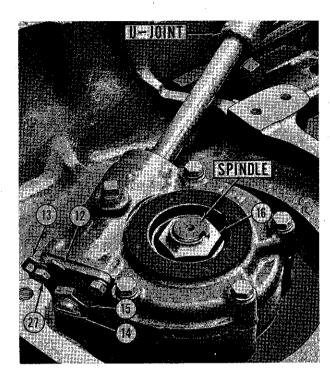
Massey-Harris 333 and 444 row crop type manual steering gear installation. Spindle end play is adjusted with nut (16). Steering gear can be adjusted without removing radiator.
